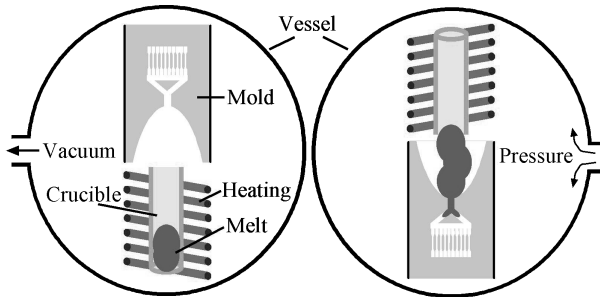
Scheme of the vacuum pressure casting process. Left: vacuum condition with mold atop the heating chamber; right: pressure condition with melt discharged into the mold by force of gravity (machine turned upside down)
